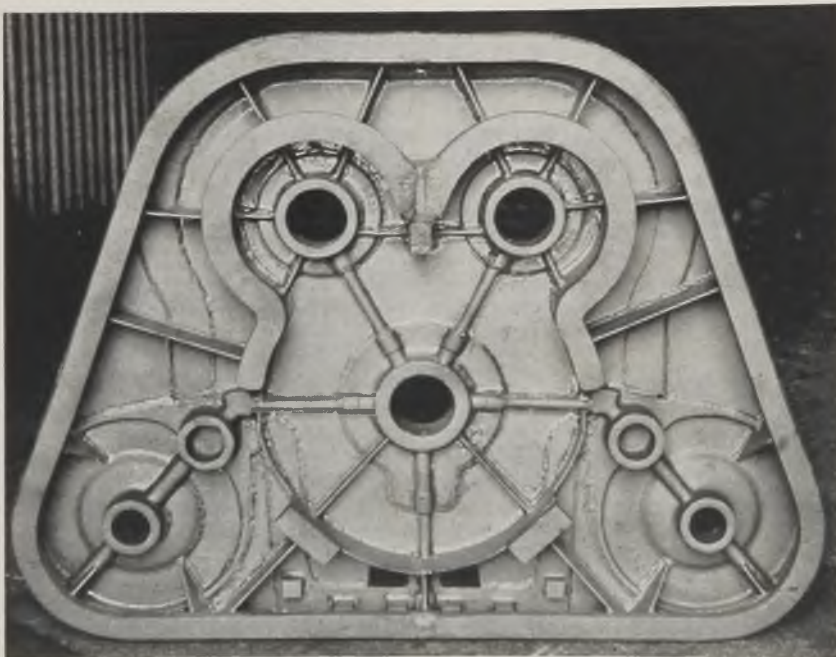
Combination of castings and plate sections were used in building this diesel engine blower drive housing
